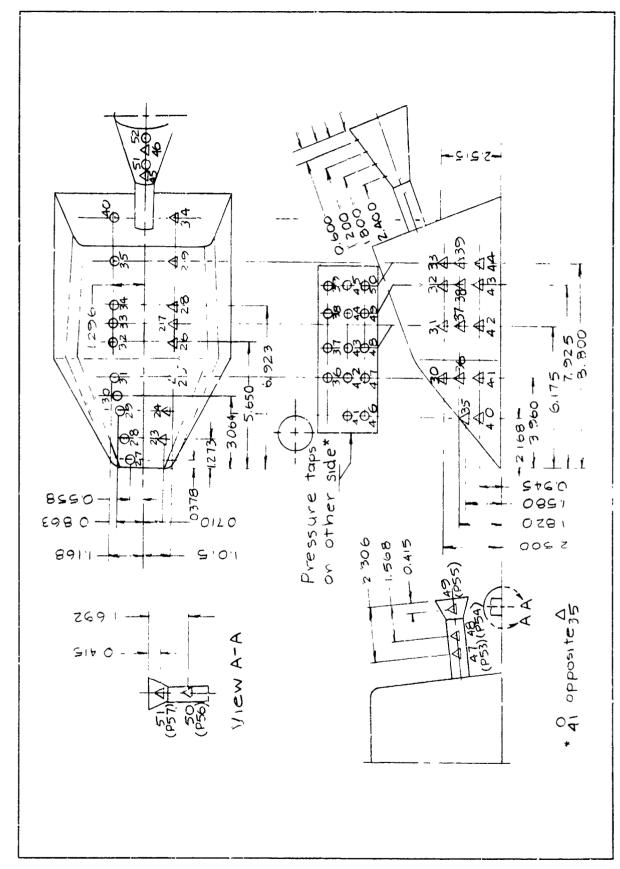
Thrustor Module Assembly Model Instrumentation Locations
